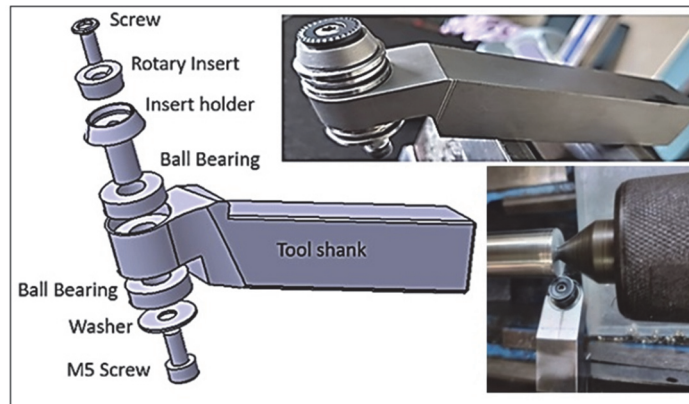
Self-propelled rotary tool (SPRT) with assembly details.
